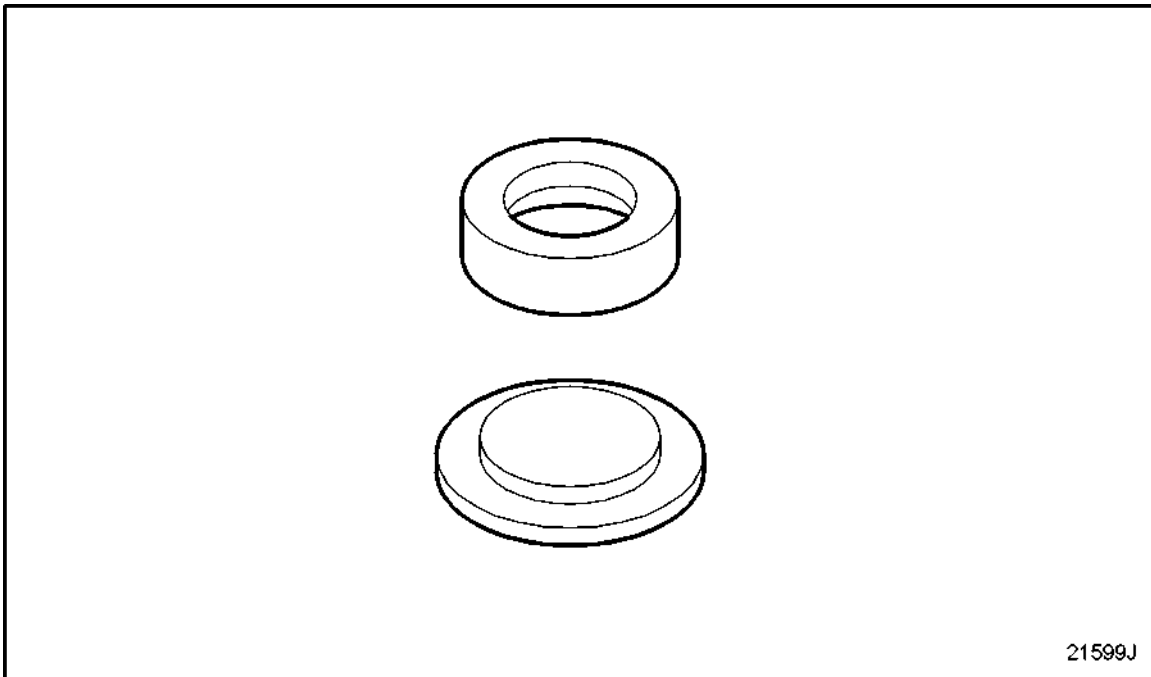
Cam Gear Assembly Fixture,J 35949
